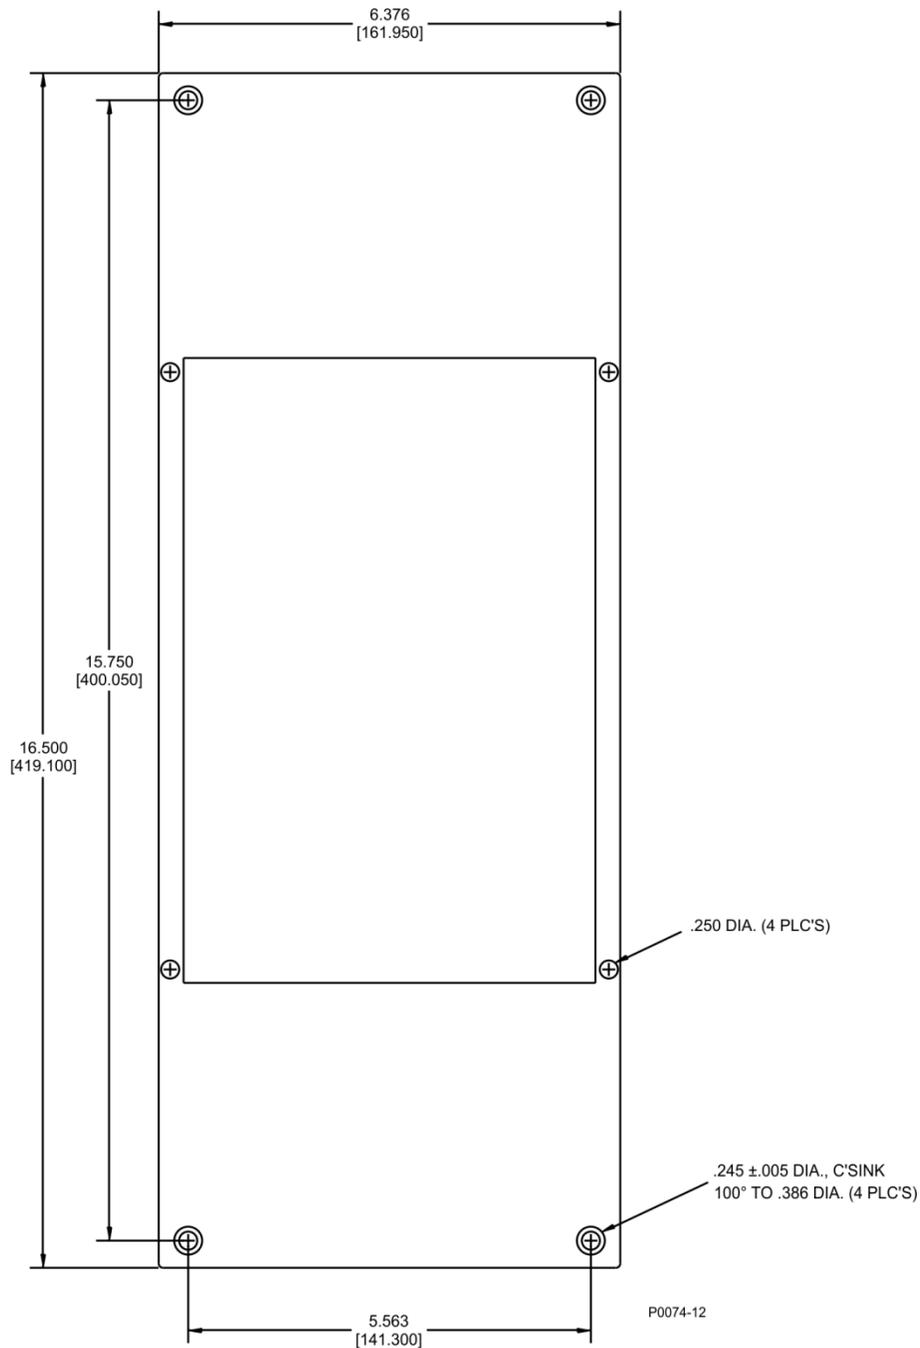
ABB FT-31/FT-32 Adapter Plate (Basler P/N: 9108551022)
